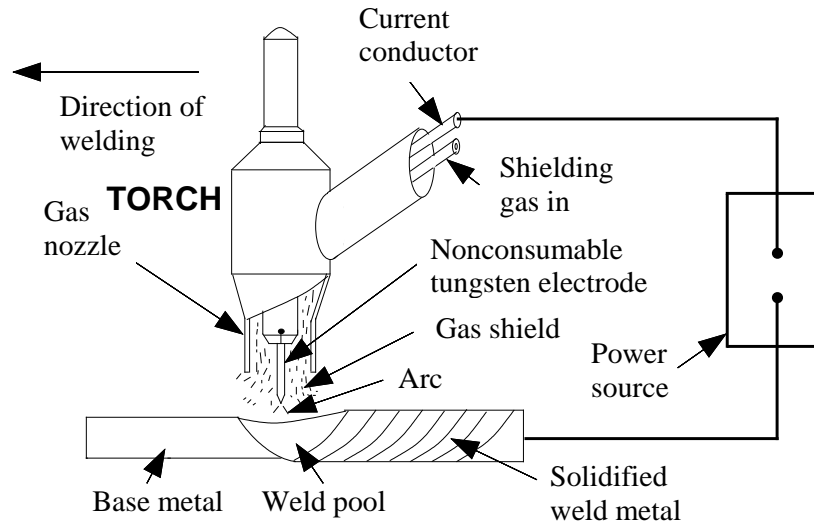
Illustration of GTAW processes and weld penetration
